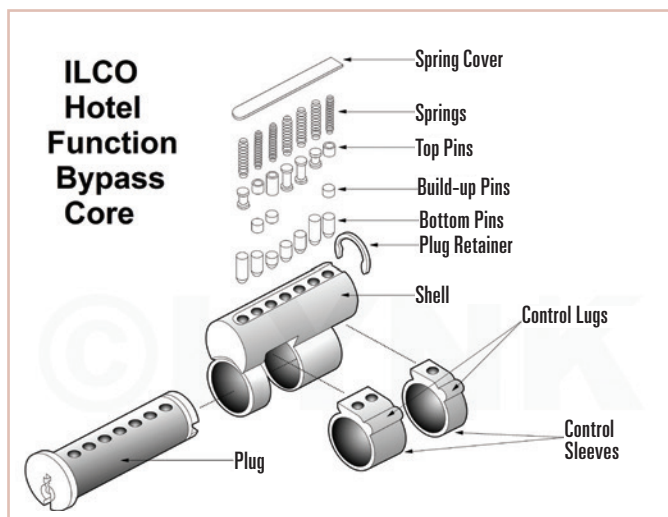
This drawing gives an exploded view of the ILCO hotel function bypass core.
